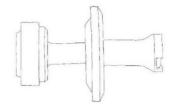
Small Car Air-Conditioner Component A - Check Valve
